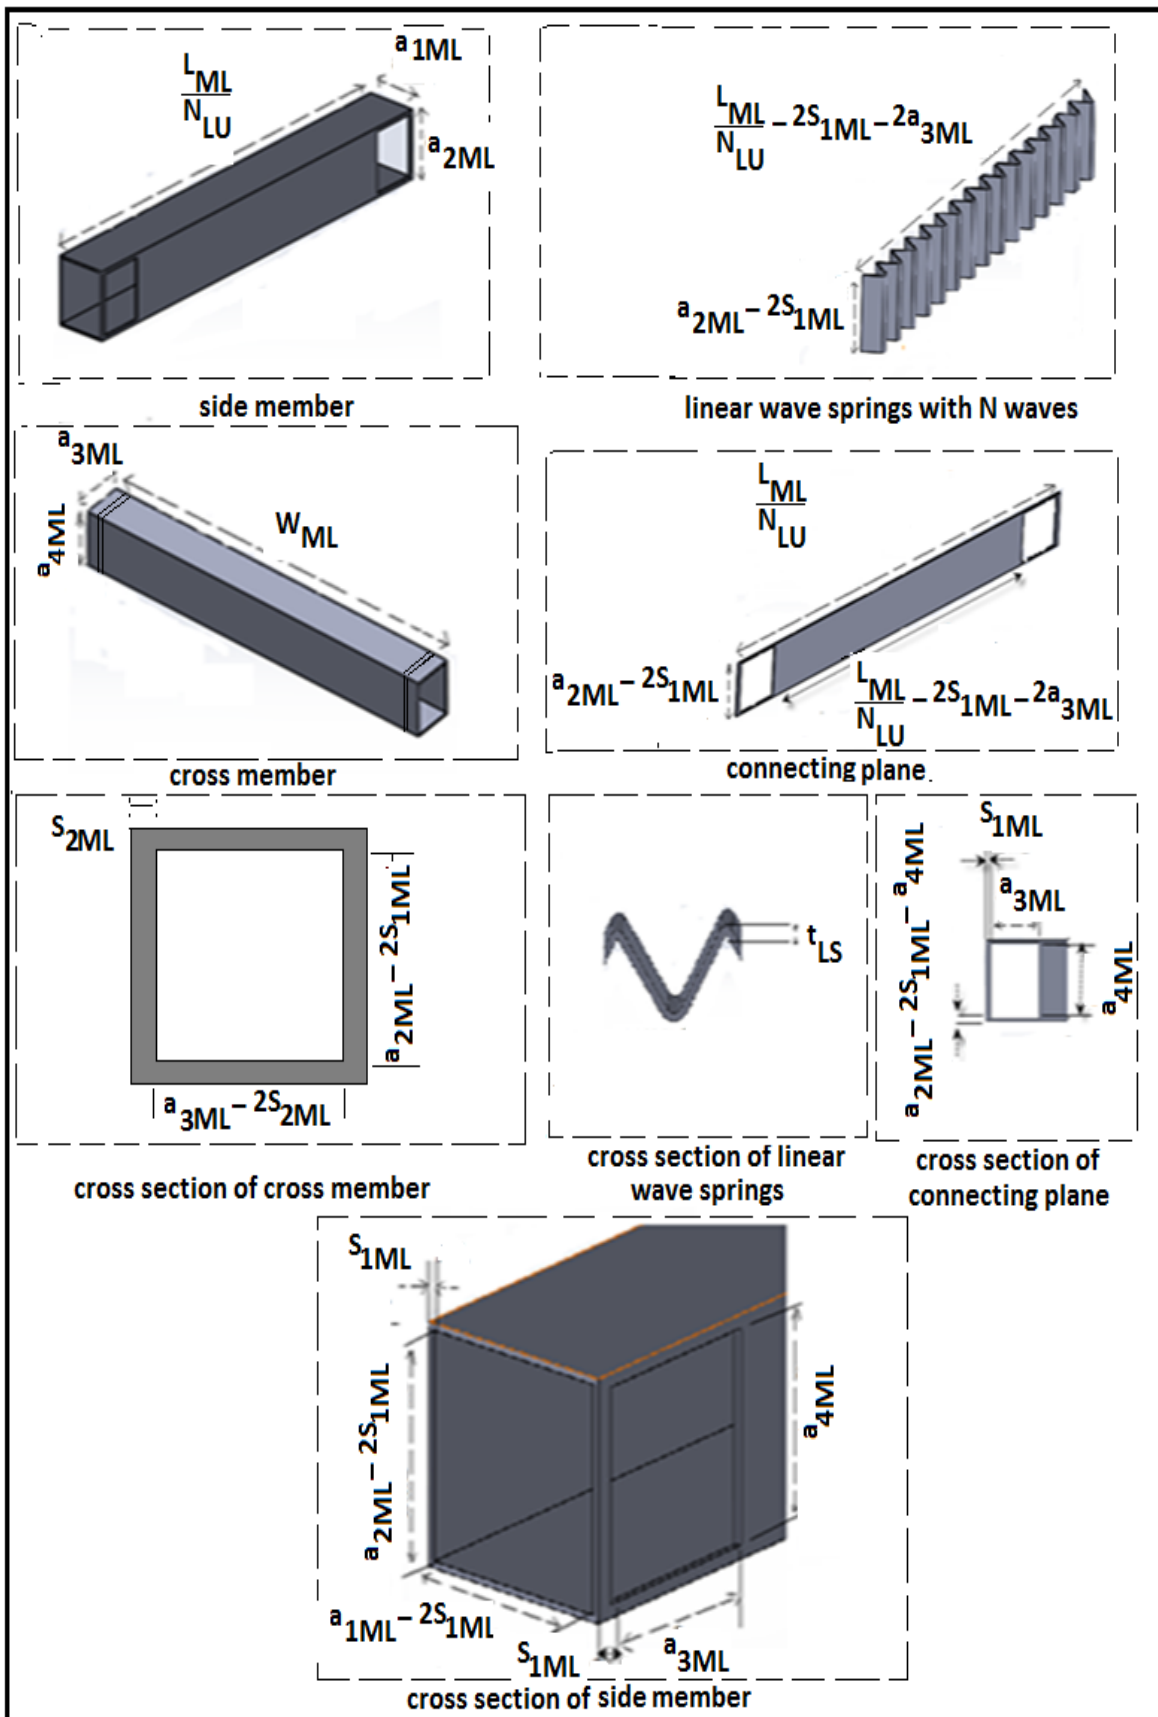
The member's dimension of the ladder frame unit equipped with wave springs
